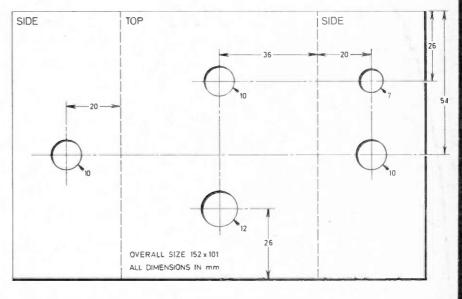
Drilling information for the case showing the positioning of the five holes.
